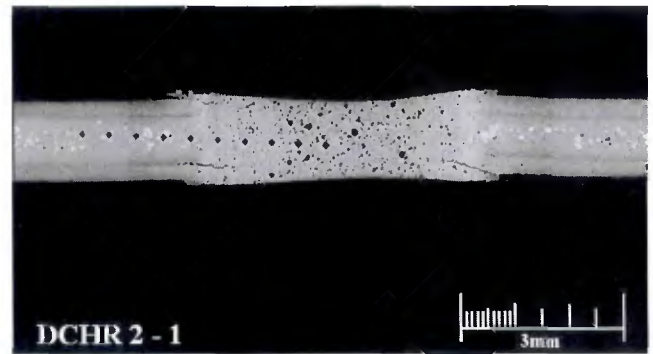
Cross section of a conductive heat seam weld made on 1.5-mm Thixomolded AM60.
